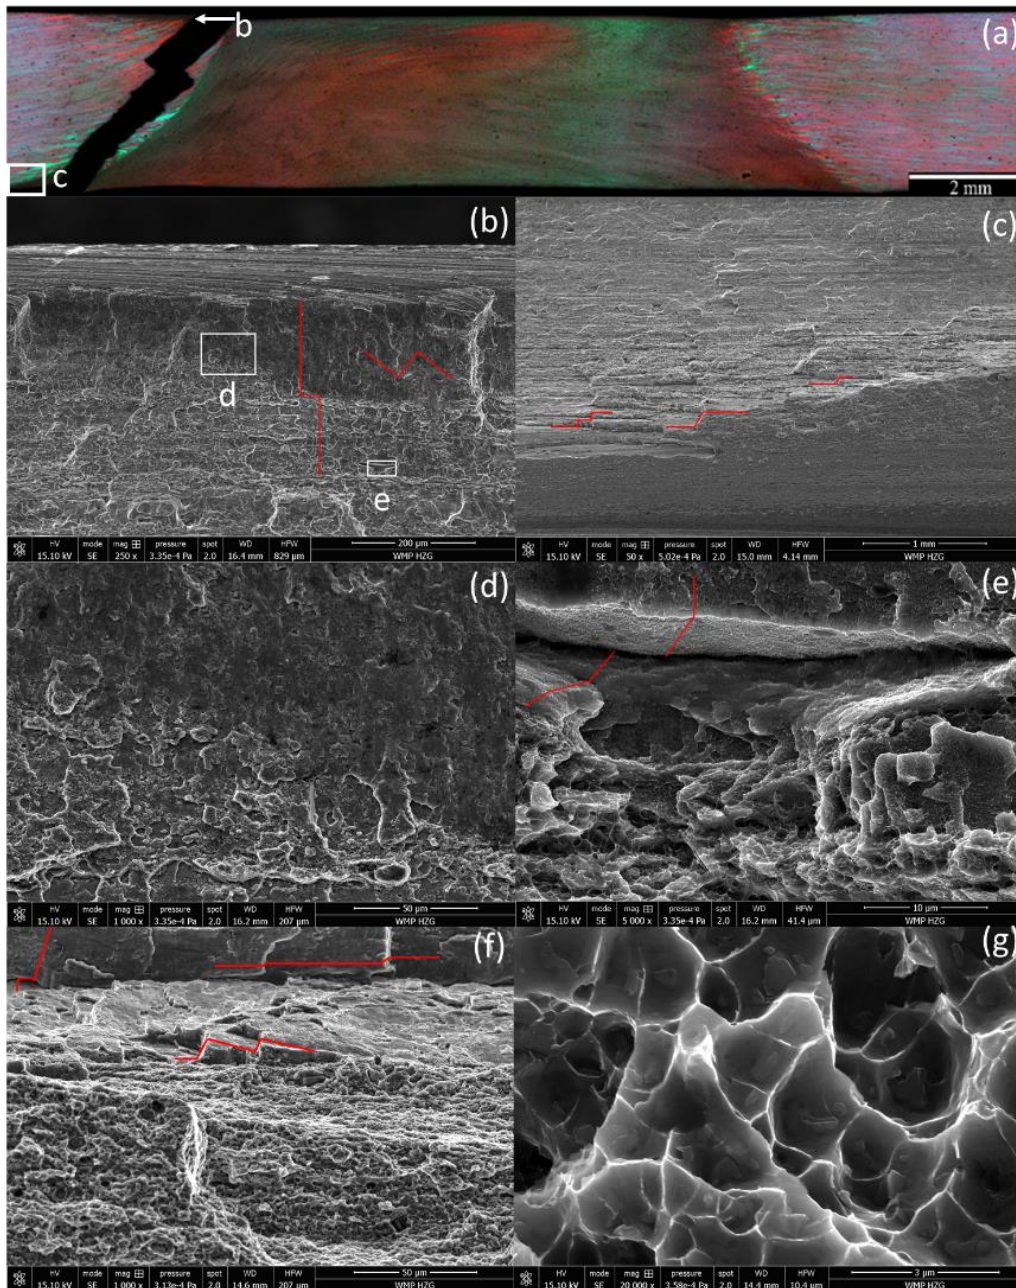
Microscopic fracture surfaces of AA2196 SSuBT-FSW HEW tensile sample: (a) optical microscope macrograph illustrating SEM direction of (b) and (c); (b) SEM perpendicular to fracture in stationary shoulder surface; (c) SEM view of TMAZ/SZ interface near rotating shoulder surface; (d) and (e) are magnified views marked on (b); (f) is the magnified view of TMAZ/SZ interface presented in (c); (g) is the magnified view of SZ presented in (f).
